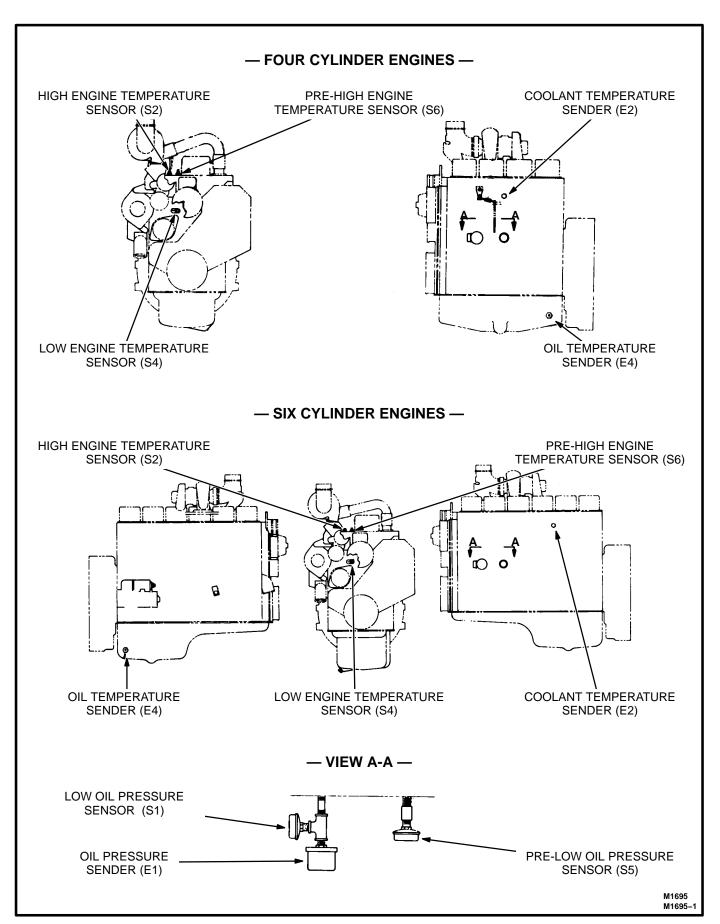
ENGINE SENSOR LOCATIONS (B-SERIES ENGINES)—PRIOR TO SPEC H
